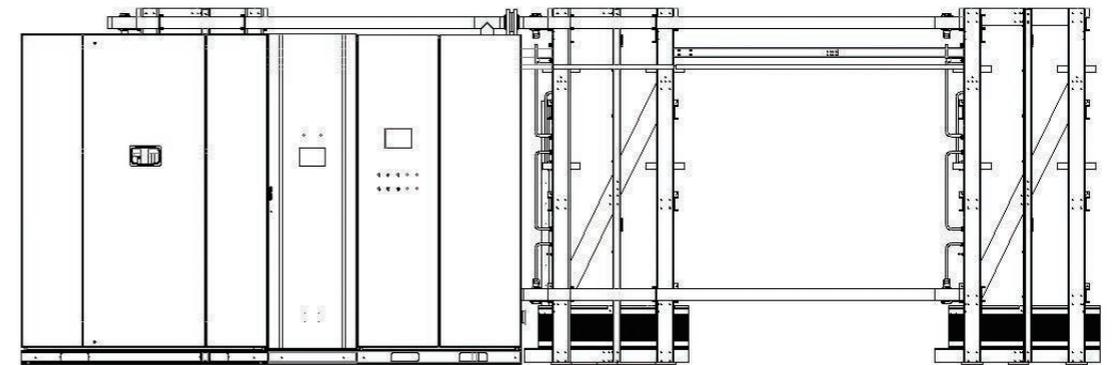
Dimensional Drawing of G31-35kV-Indoor-Water Cooling FGSVG-C5.0/35-W
